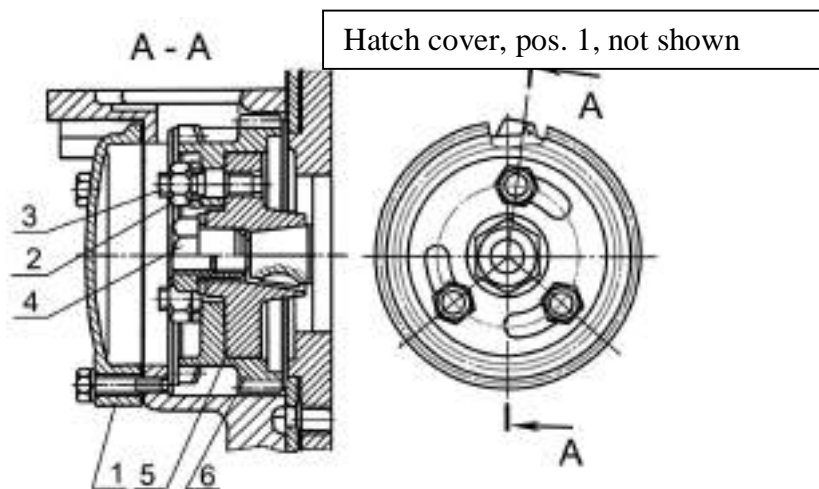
Install latch in back plate and flywheel hole.
